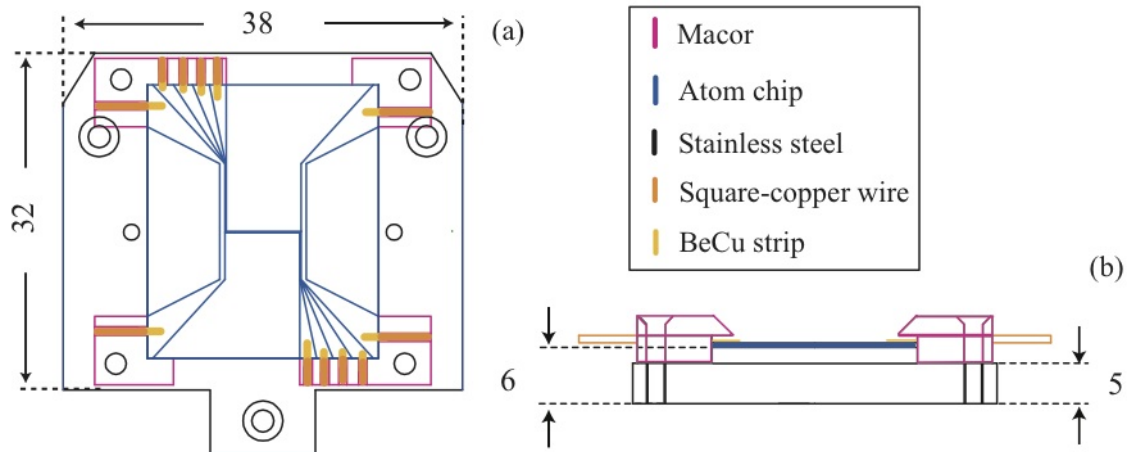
The new atom chip has been mounted directly onto a stainless-steel heat sink. It is fixed on place by four corner-shaped pieces of Macor grooved with 0.81 mm square channels. In each channel, a thin strip of BeCu and 20 gauge square copper wire are fixed to allow electric contact from each wire to the control hardware of the experiment (a). The connections were mechanically supported by another set of four corner-shaped pieces of Macor that were bolted to the heat-sink block through the grooved pieces of Macor (b).
